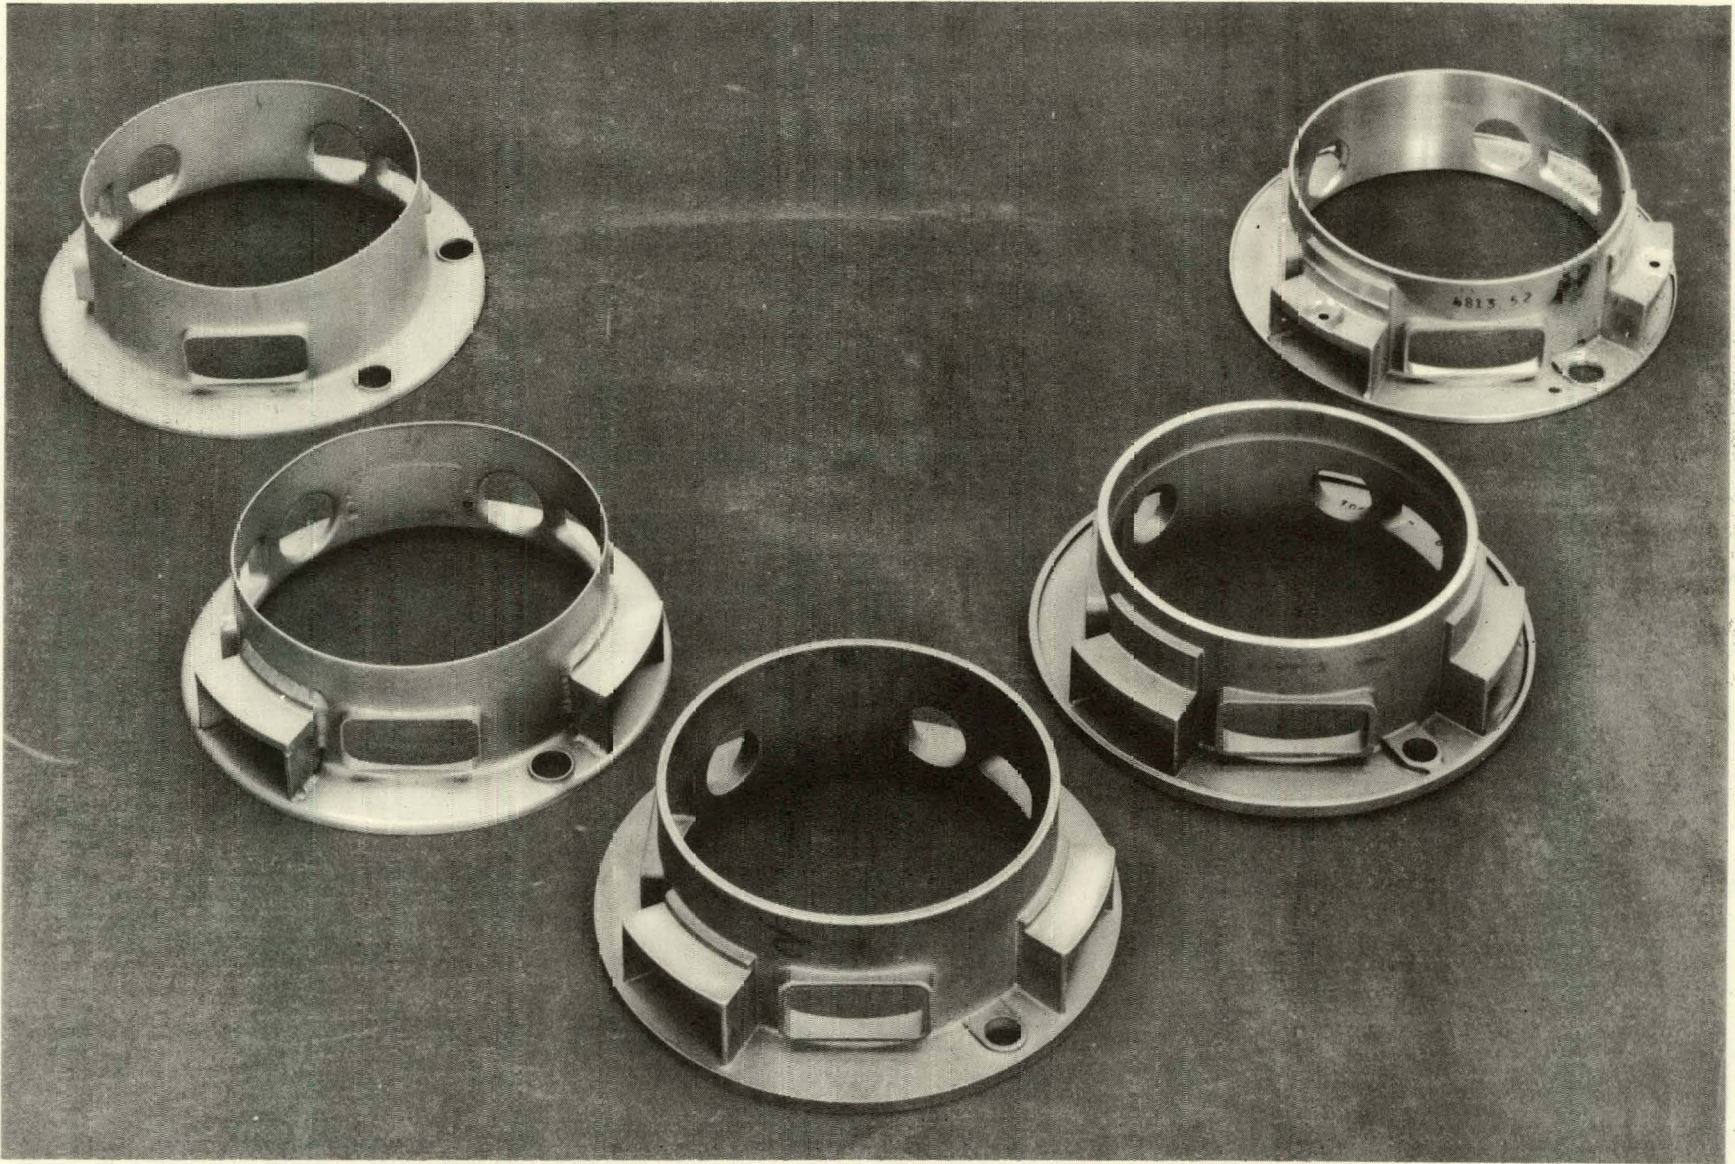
Evolution of Case from Formed Sheet Metal to Machined Casting
